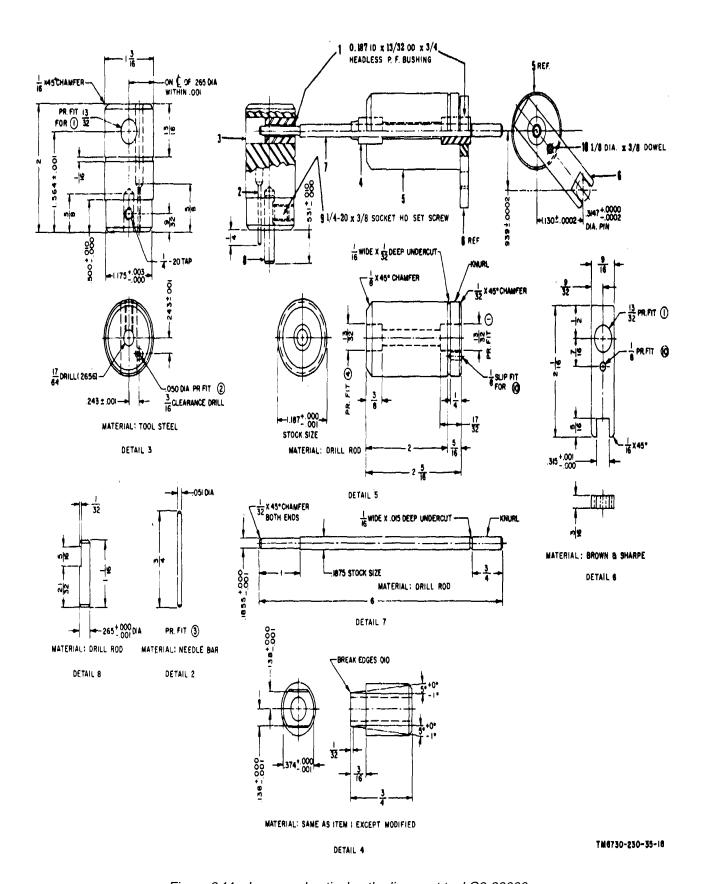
Lamp and optical path alignment tool G3-38000.
